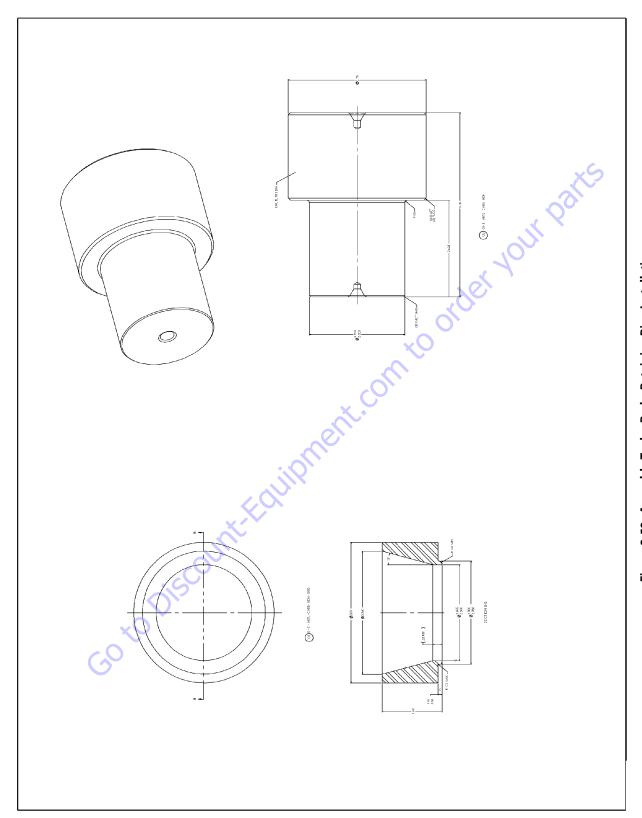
Assembly Tools - Brake Retaining Ring Installation
